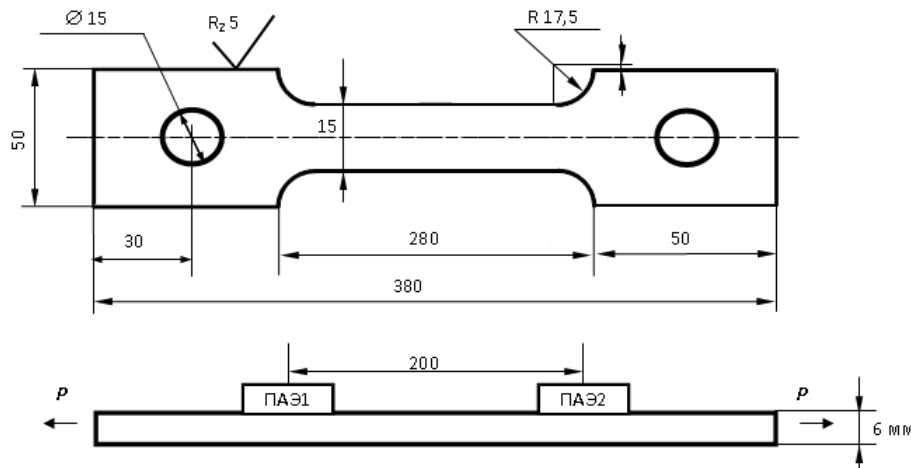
Overall dimensions of the test objects without stress concentrations and scheme of receiving transducers positioning.
